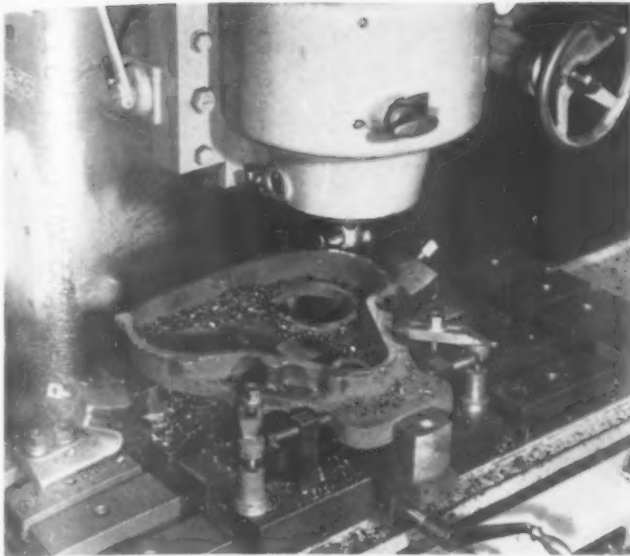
Milling a cast steel channel with HSS cutters. Cutting speed 150 fpm, feed 5 ipm. Coolant is one part prepared oil to 40 parts water.
